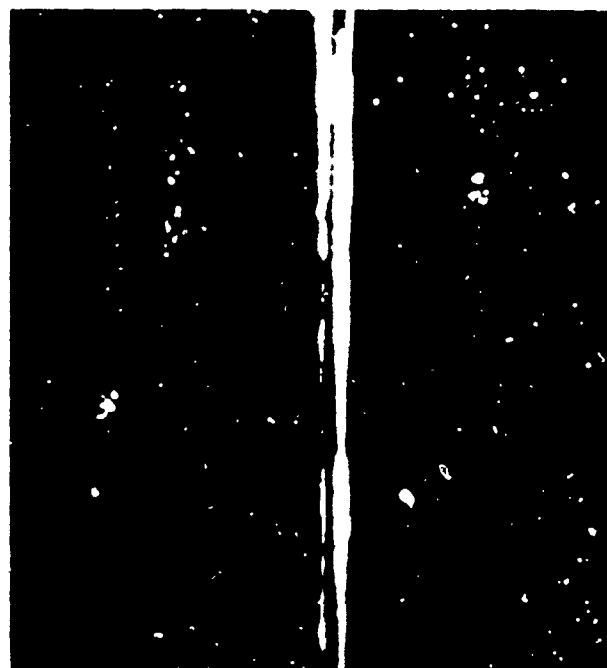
Shrink defects located up to 30 mils below the surface in a hollow investment casting. Vertical line caused by wrapping film around the component.
